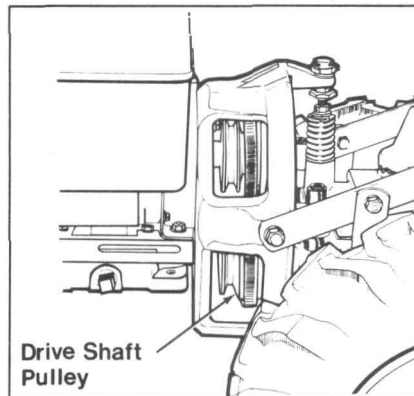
Pre-Disassembly Inspection of the Drive Shaft Pulley.
